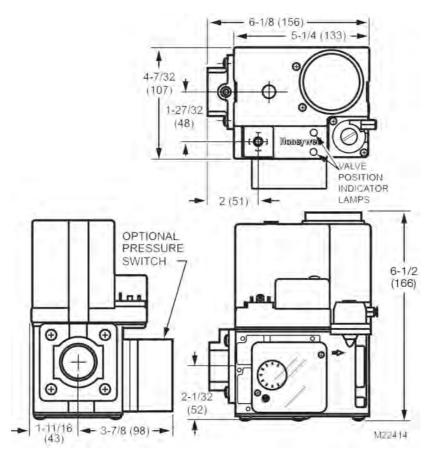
V4730C/V8730C Gas Valves, 1/2 in. (13 mm) and 3/4 in. (19 mm) size, dimensions in in. (mm).
